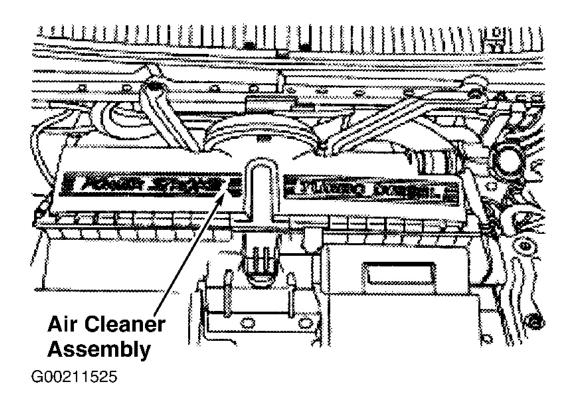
Removing & Installing Air Cleaner Assembly Courtesy of FORD MOTOR CO.
